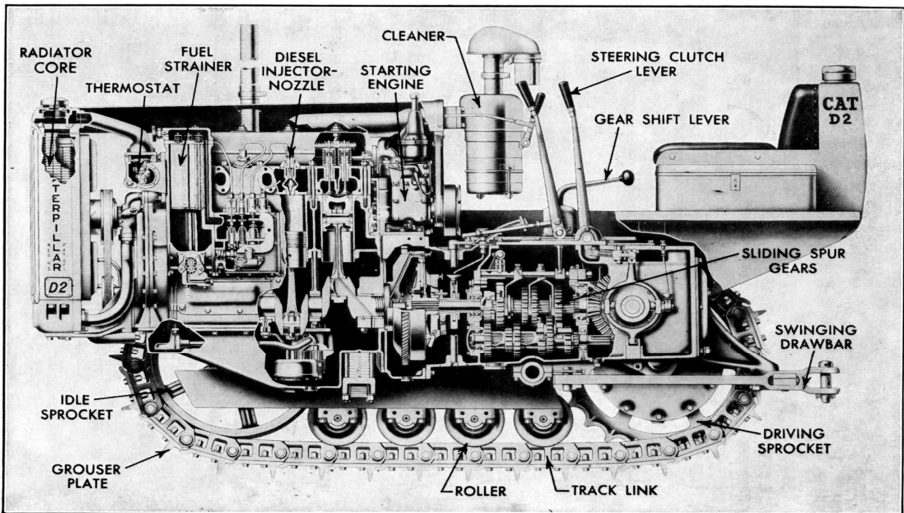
Crawler-tractor section showing the important parts of the power plant and train.
